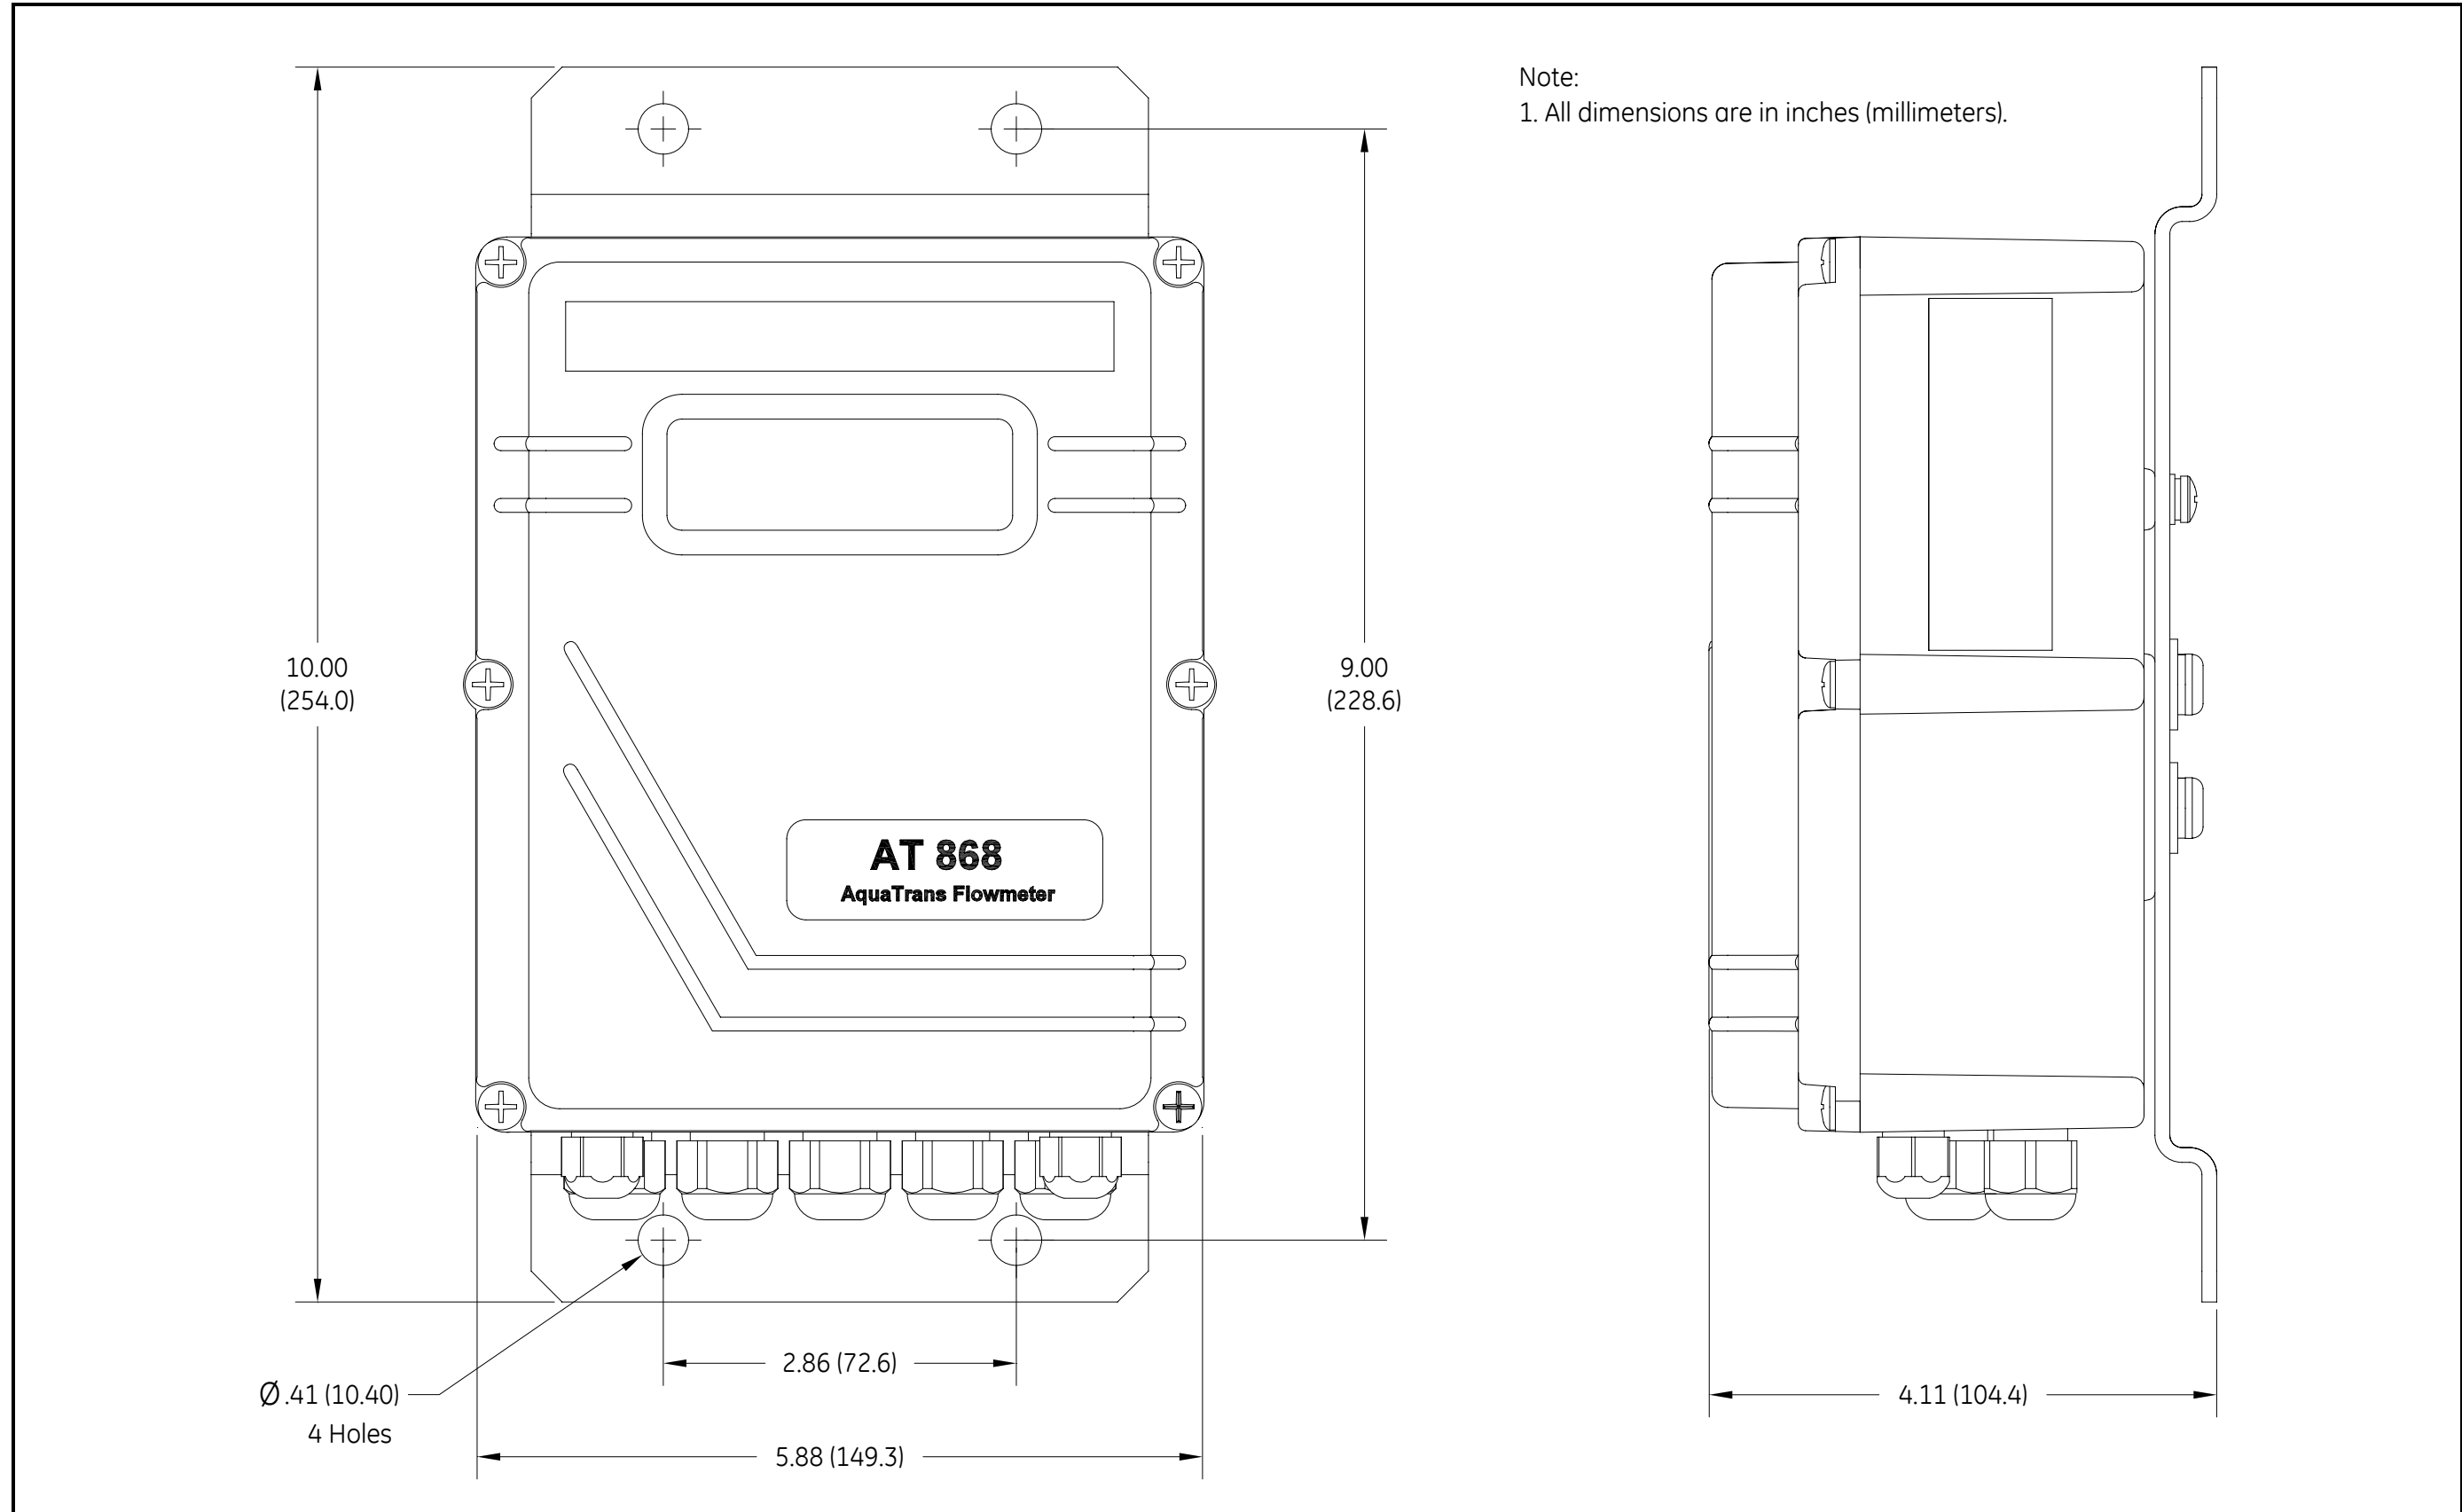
Outline and Installation - Wall Mount (Ref. #712-1106C, sht 1)
